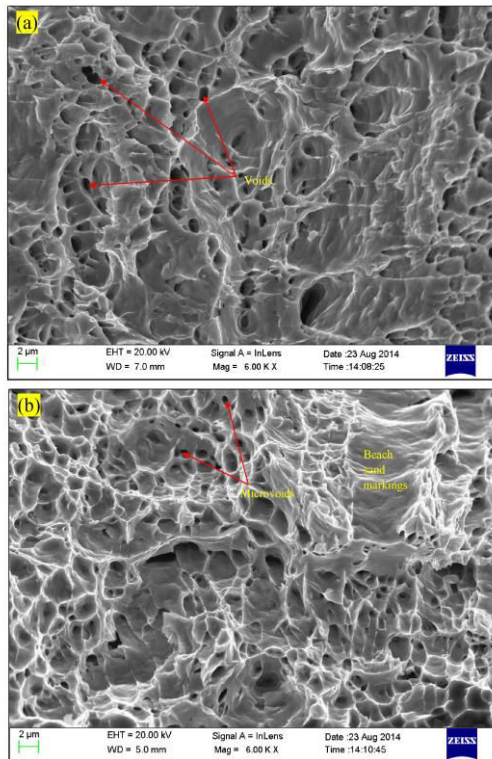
SEM fractographs on the tensile tested samples of (a) ER 2553 (b) ERNiCrMo-4 weldments.
